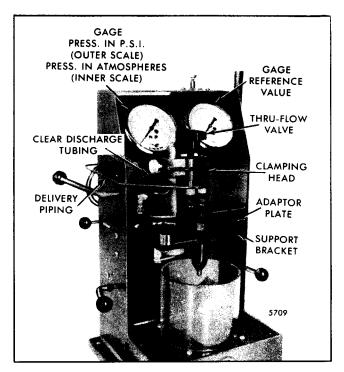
Injector Installed in Tester J 23010 with Clamping Head
